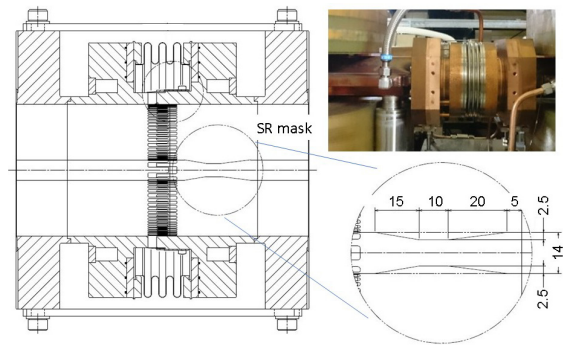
Cross-sectional view of a bellows chamber with SR masks inside antechambers.
